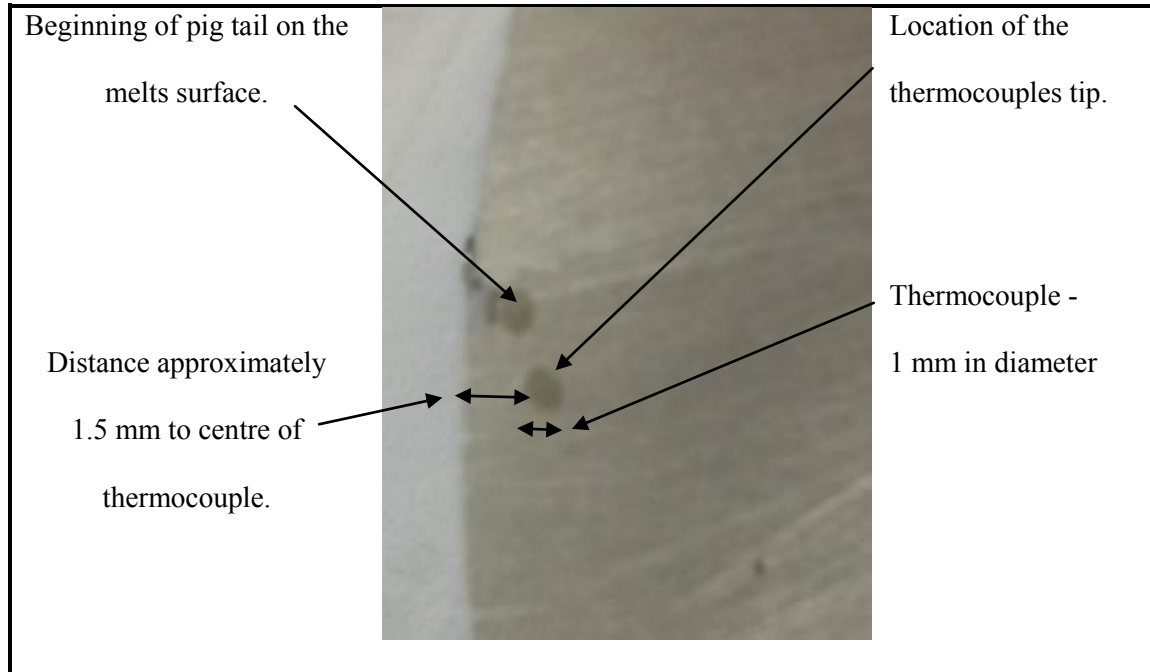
Photograph to show the location of thermocouple tip solidified within the LM25 casting.
